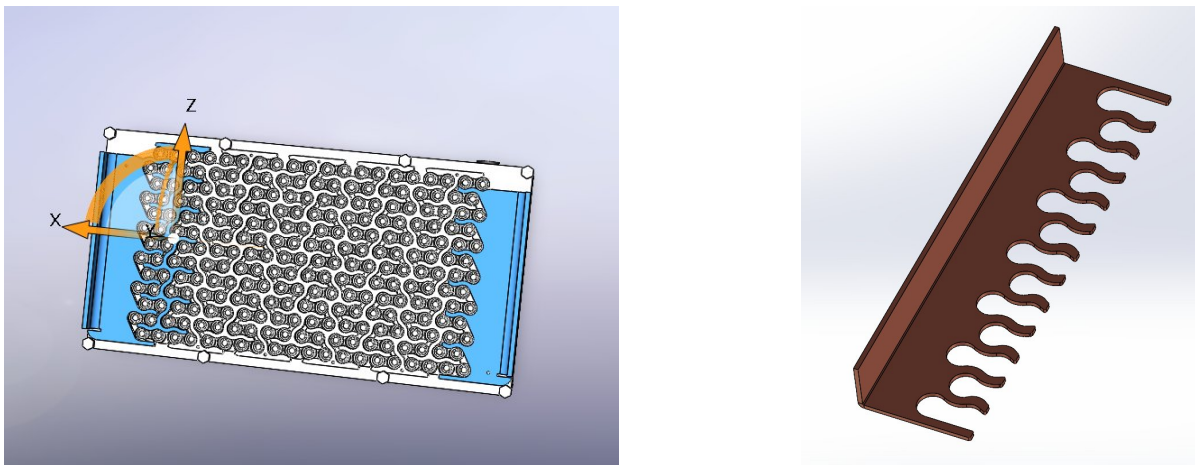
Left: busbar placement within the module assembly. Right: terminal busbar detail showing copper comb geometry with individual cell-tab contact fingers.
